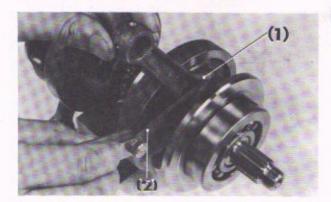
(1) Connecting rod (2) Feeler gauge
